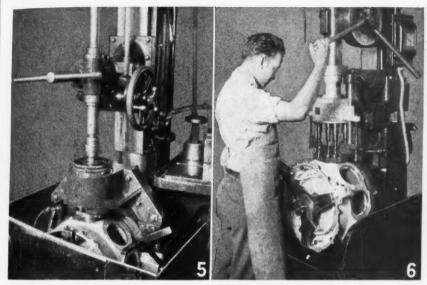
Boring the cylinder pads in the crankcases. Fig. 6—Drilling eight 5/16-in. holes to be tapped for the cylinder hold-down studs.
